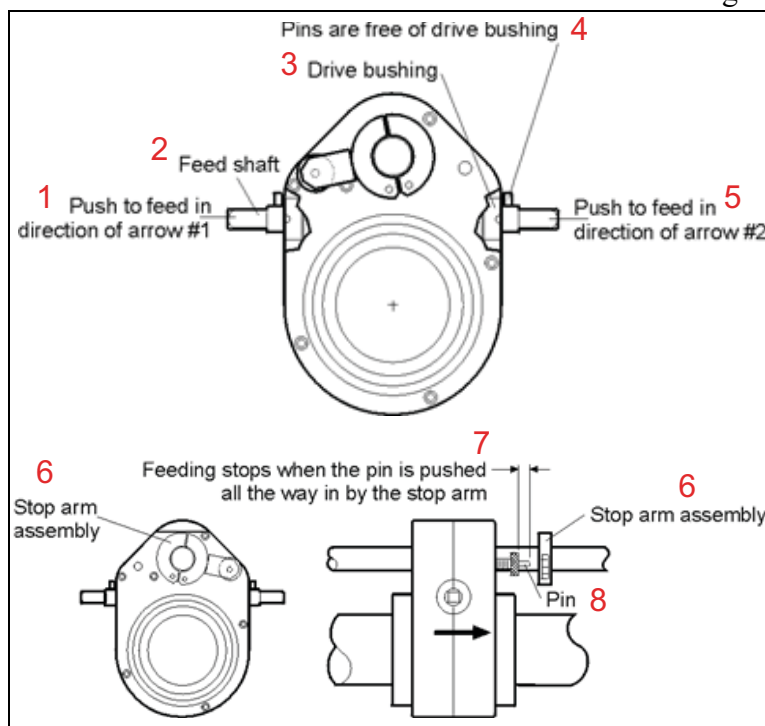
DISENGAGING THE AXIAL FEED
